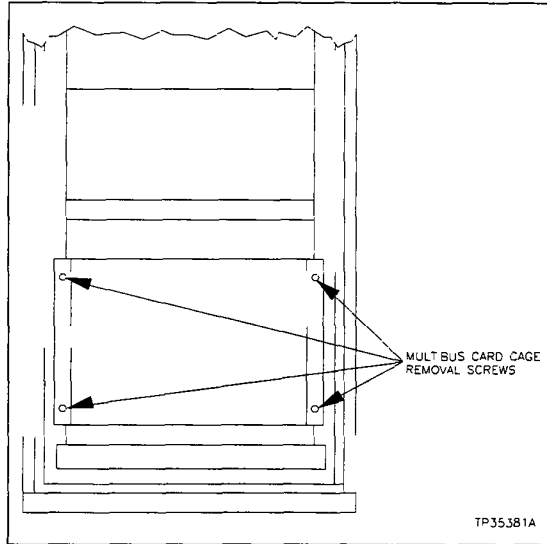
13. Multibus Card Cage Removal for IIOIS20A
